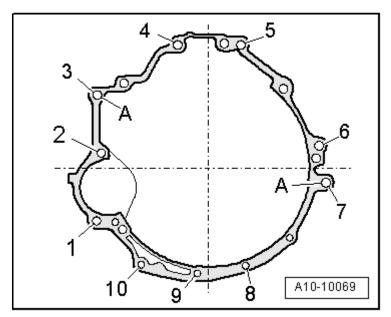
Identifying Engine/Transmission Threaded Connections Courtesy of VOLKSWAGEN UNITED STATES, INC.
